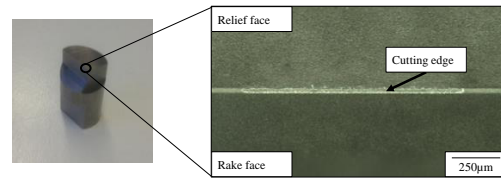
Condition of cutting edge after machining tungsten carbide (WC-11.8Co, $v_c = 140$ m/min, $h_{cu} = 10$ μm)
